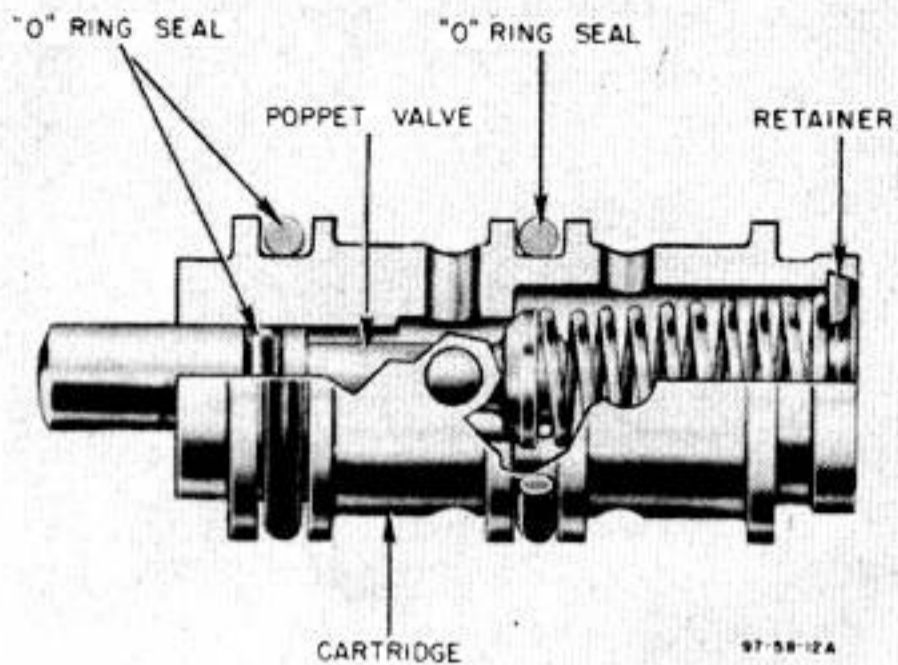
Hydraulic Wing Flap Control Valve Cartridge
